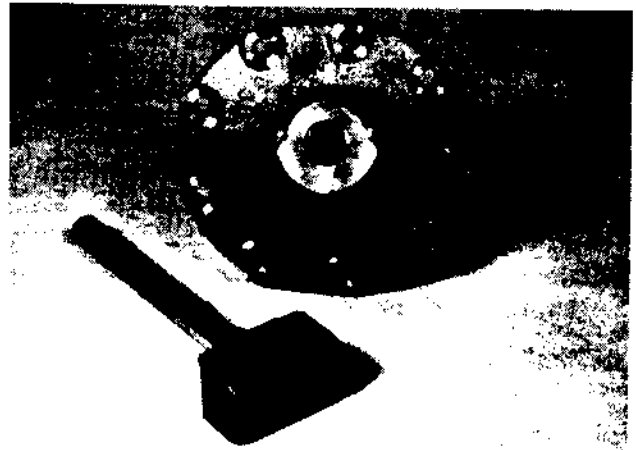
Back Handhole Cover With Crankcase Oil Heater
